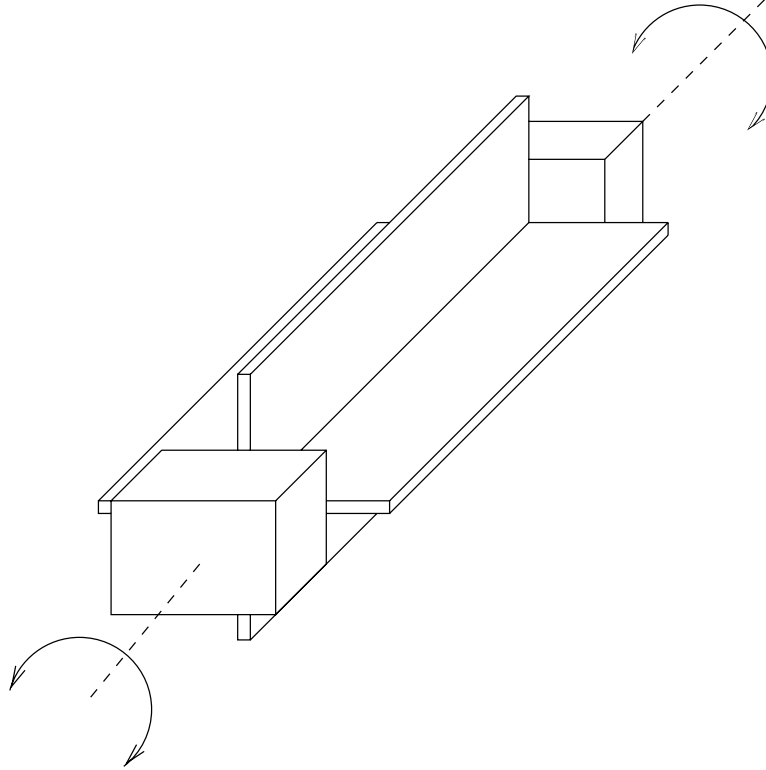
Spring design. The figure shows a torsional spring with a cross-shaped cross-section. This shape gives a spring which is strong while still being flexible.
